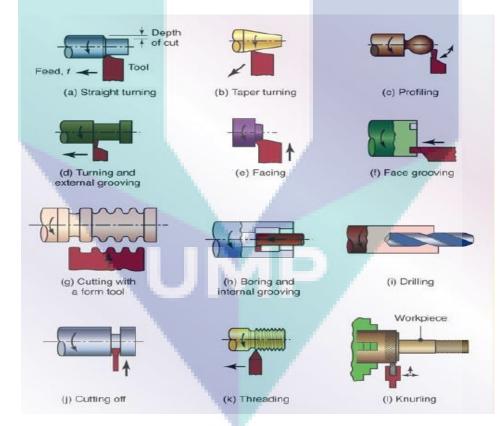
Various machining process can be done by using a lathe machine. Source: Kalpakjian and Schmid (2014).
